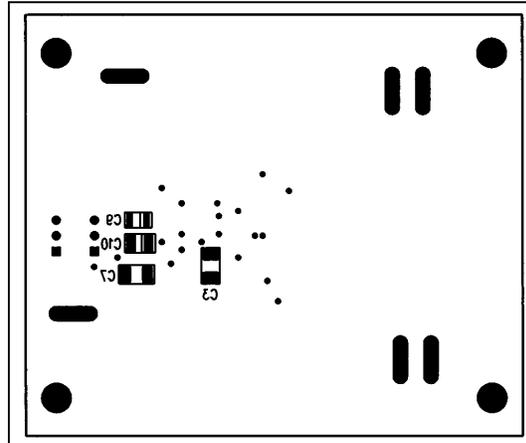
MAX742 EV Kit Component Placement Guide—Solder Side
